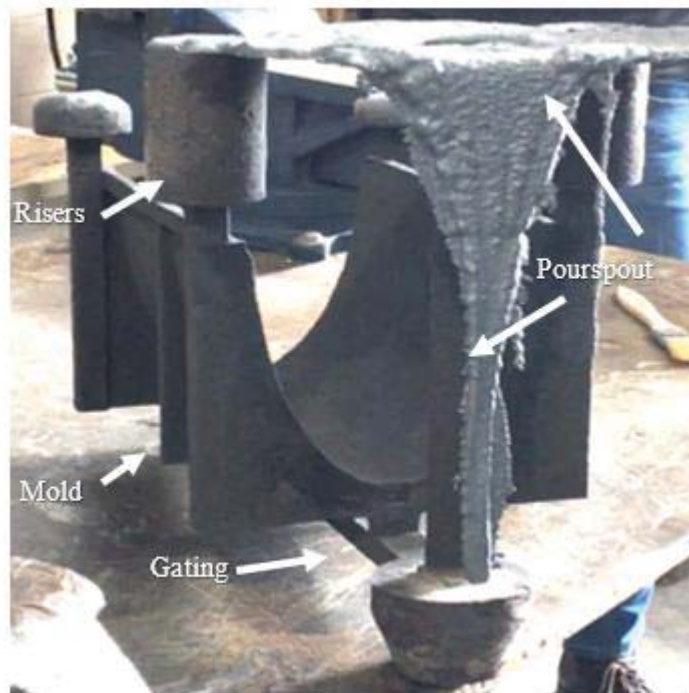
Cast Invar part after being removed from the sand mold with gating, risers and pour spout attached
